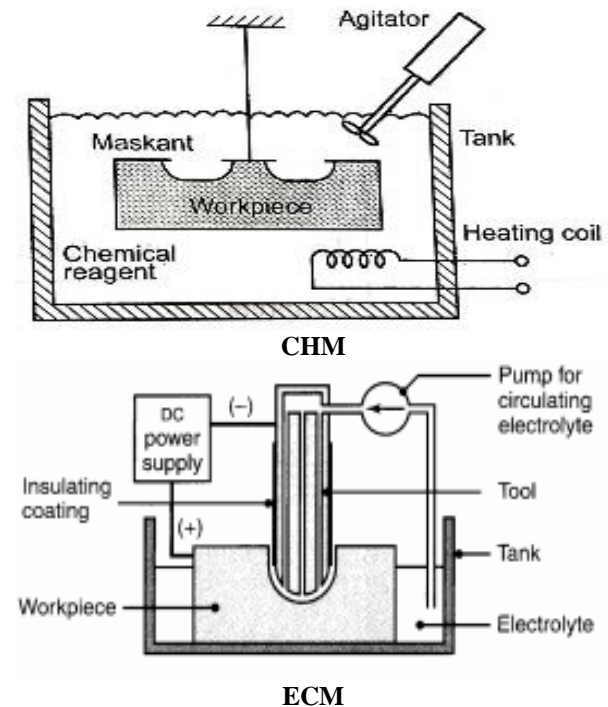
Comparison of Chemical Machining (CHM) and Electrochemical Machining (ECM).
